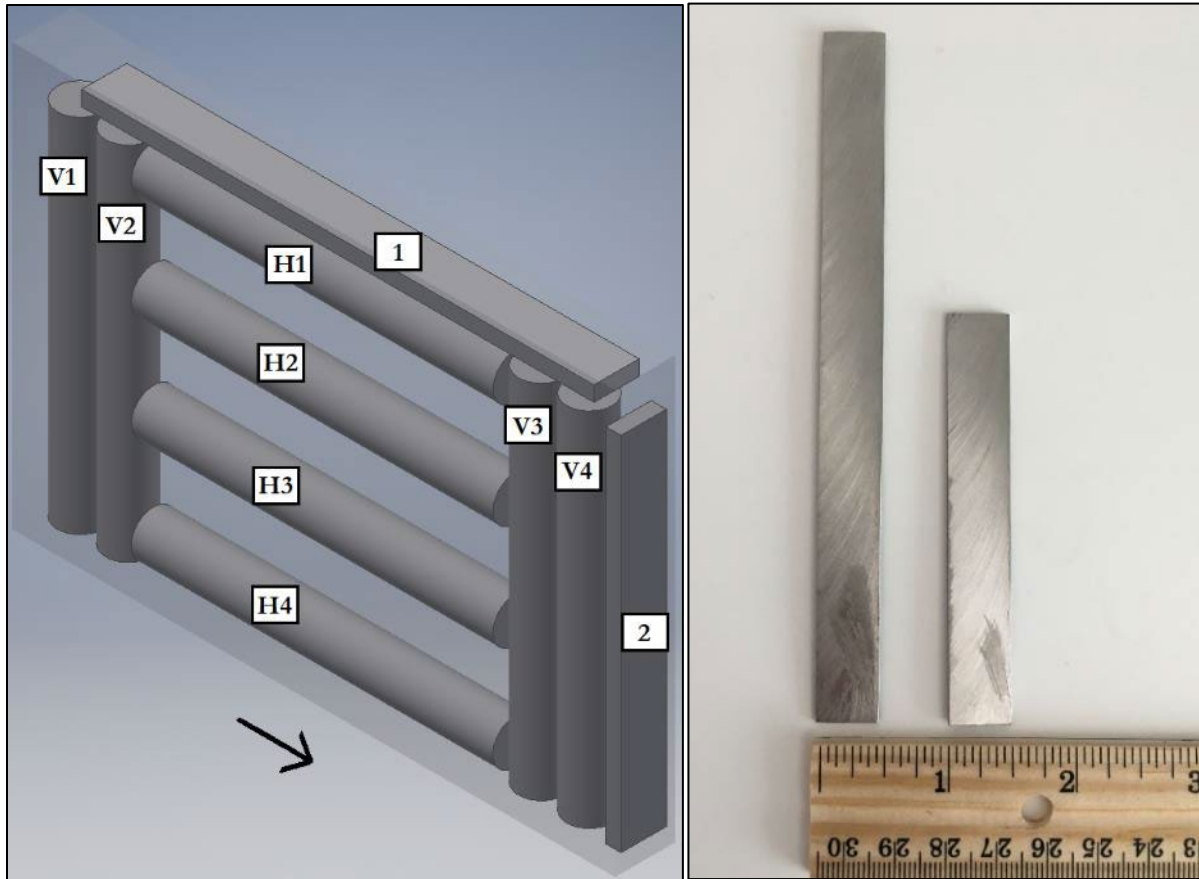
Left: Schematic of sample orientation for the stainless steel tensile bars (labeled “H” and “V”) and bend samples (labeled “1” and “2”); samples were machined from one printed wall piece; the arrow indicates the “Z” printing direction. Right: Photograph of physical bend samples after removal from test wall.
